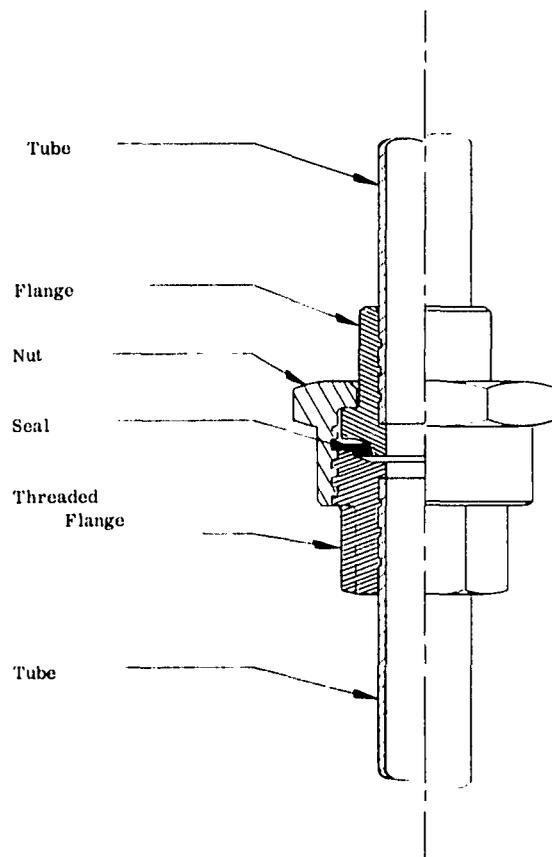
GAMAH TUBE FITTING ASSEMBLY DRAWING (Gamah P/N JT 29)
